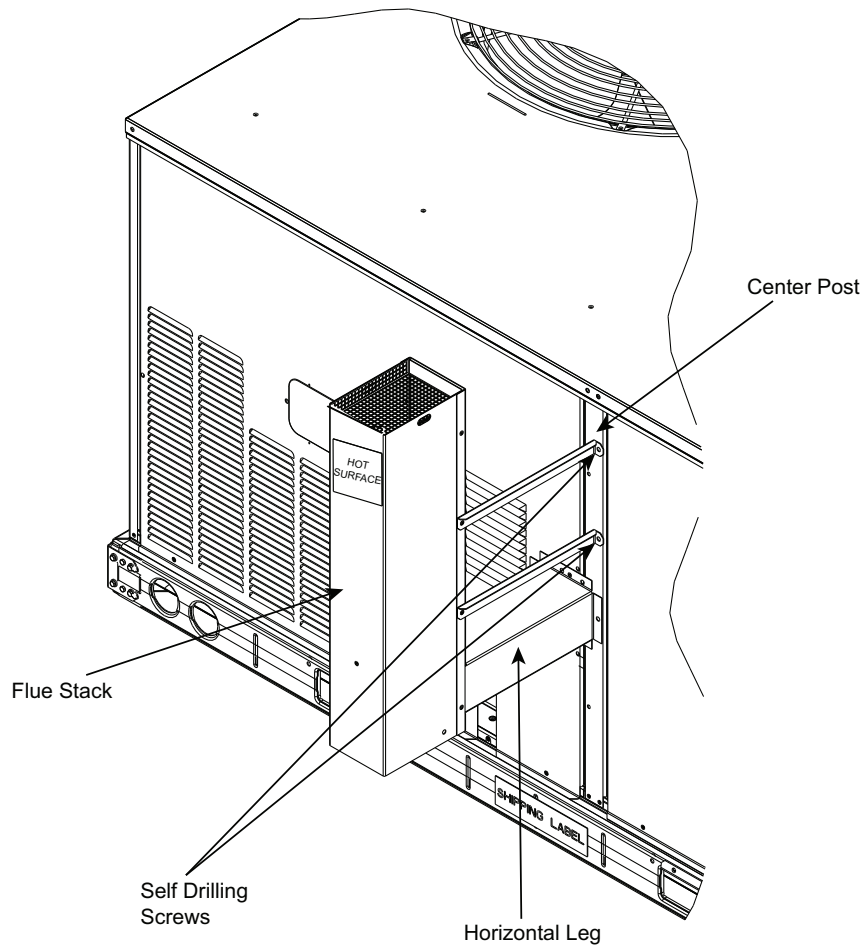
Flue Discharge Deflector Assembly (Front and Side View)
